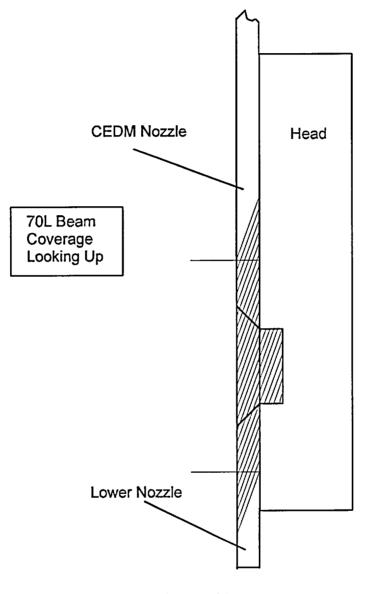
PSL1 and PSL2 CEDM Temper Bead Weld Repair, 70L UT Beam Coverage Looking Up
